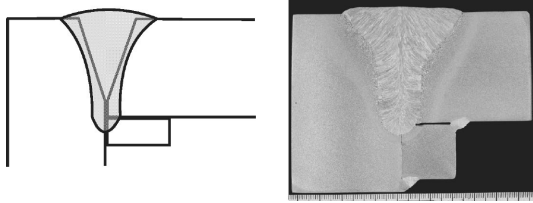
Example of cross section of single pass corner welding joint by double electrode submerged arc welding method (Steel thickness: 50 mm)
